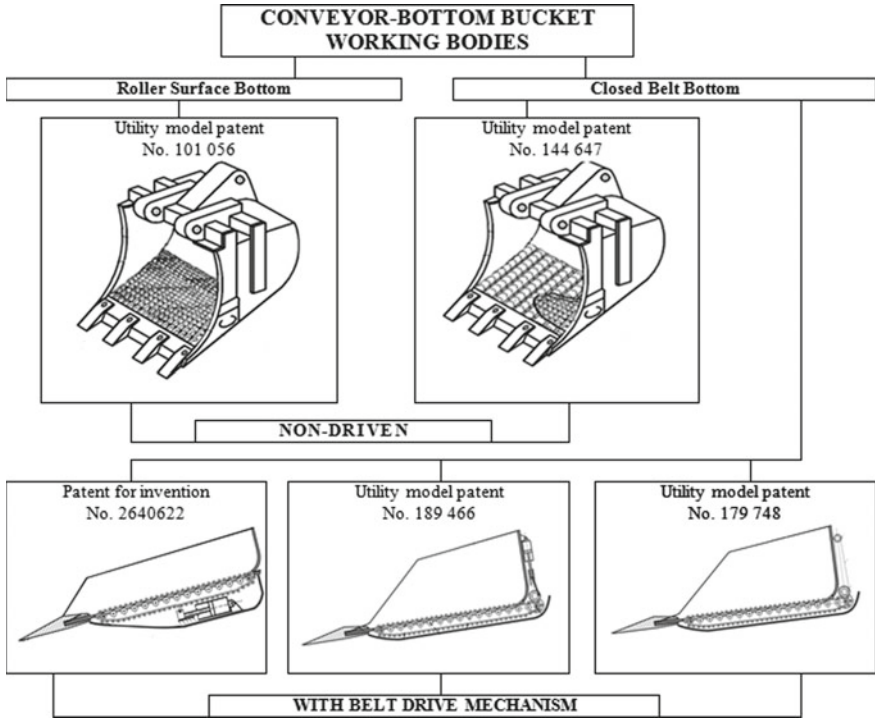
Systematics of conveyor-bottom bucket working bodies
